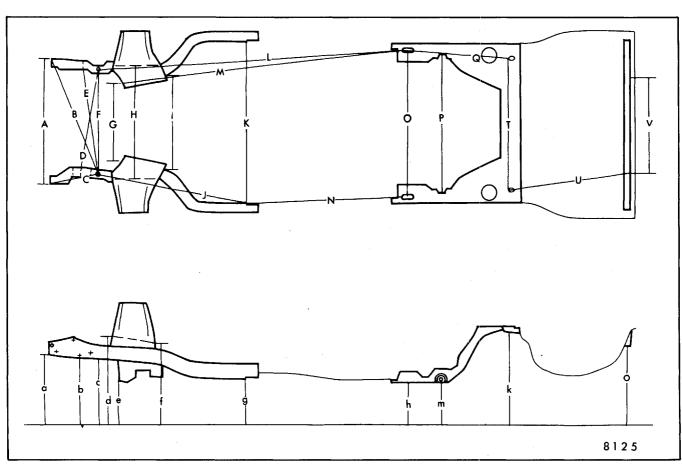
Horizontal and Vertical Checking Dimensions - H-07 and 27 Styles
